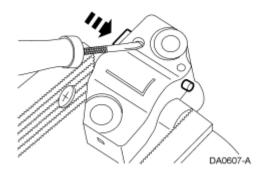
Pushing Back And Holding Ratchet Mechanism Courtesy of FORD MOTOR CO.
